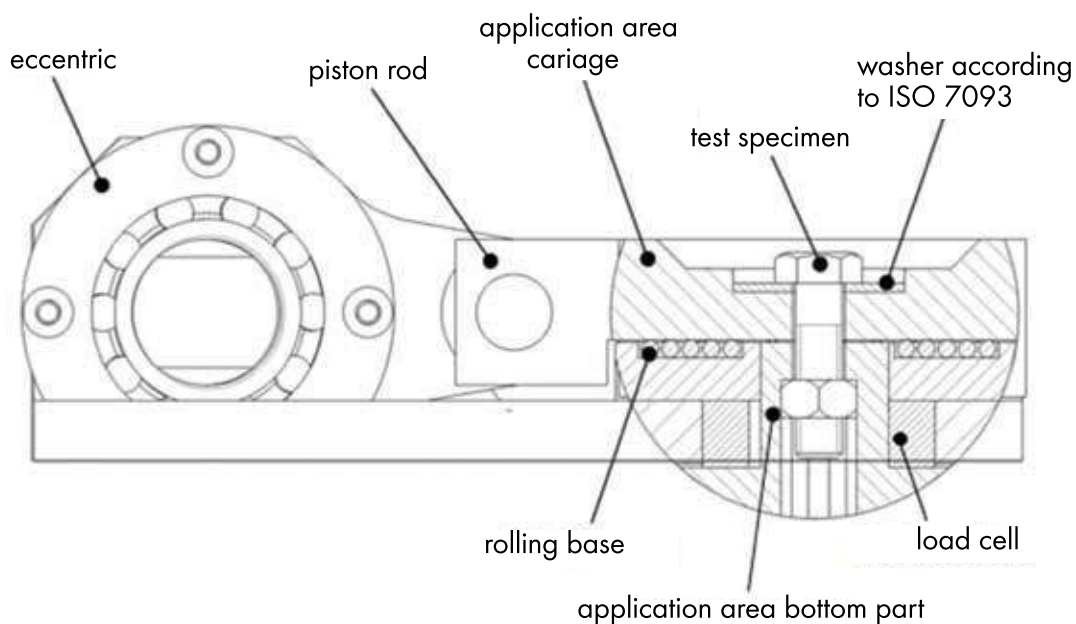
Sectional drawing Vibration test bench according to DIN 65151¹
